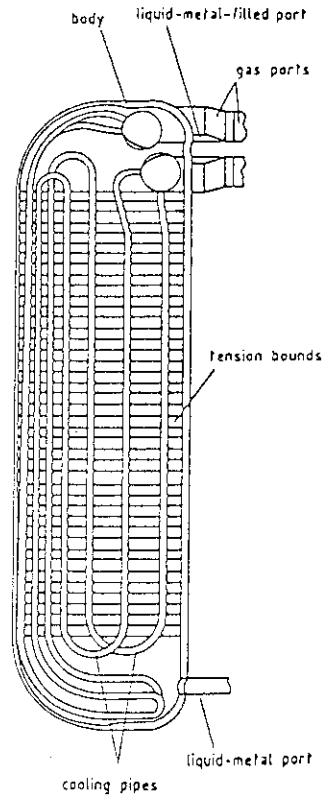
Carbon-dioxide-cooled blanket.²⁵⁾
